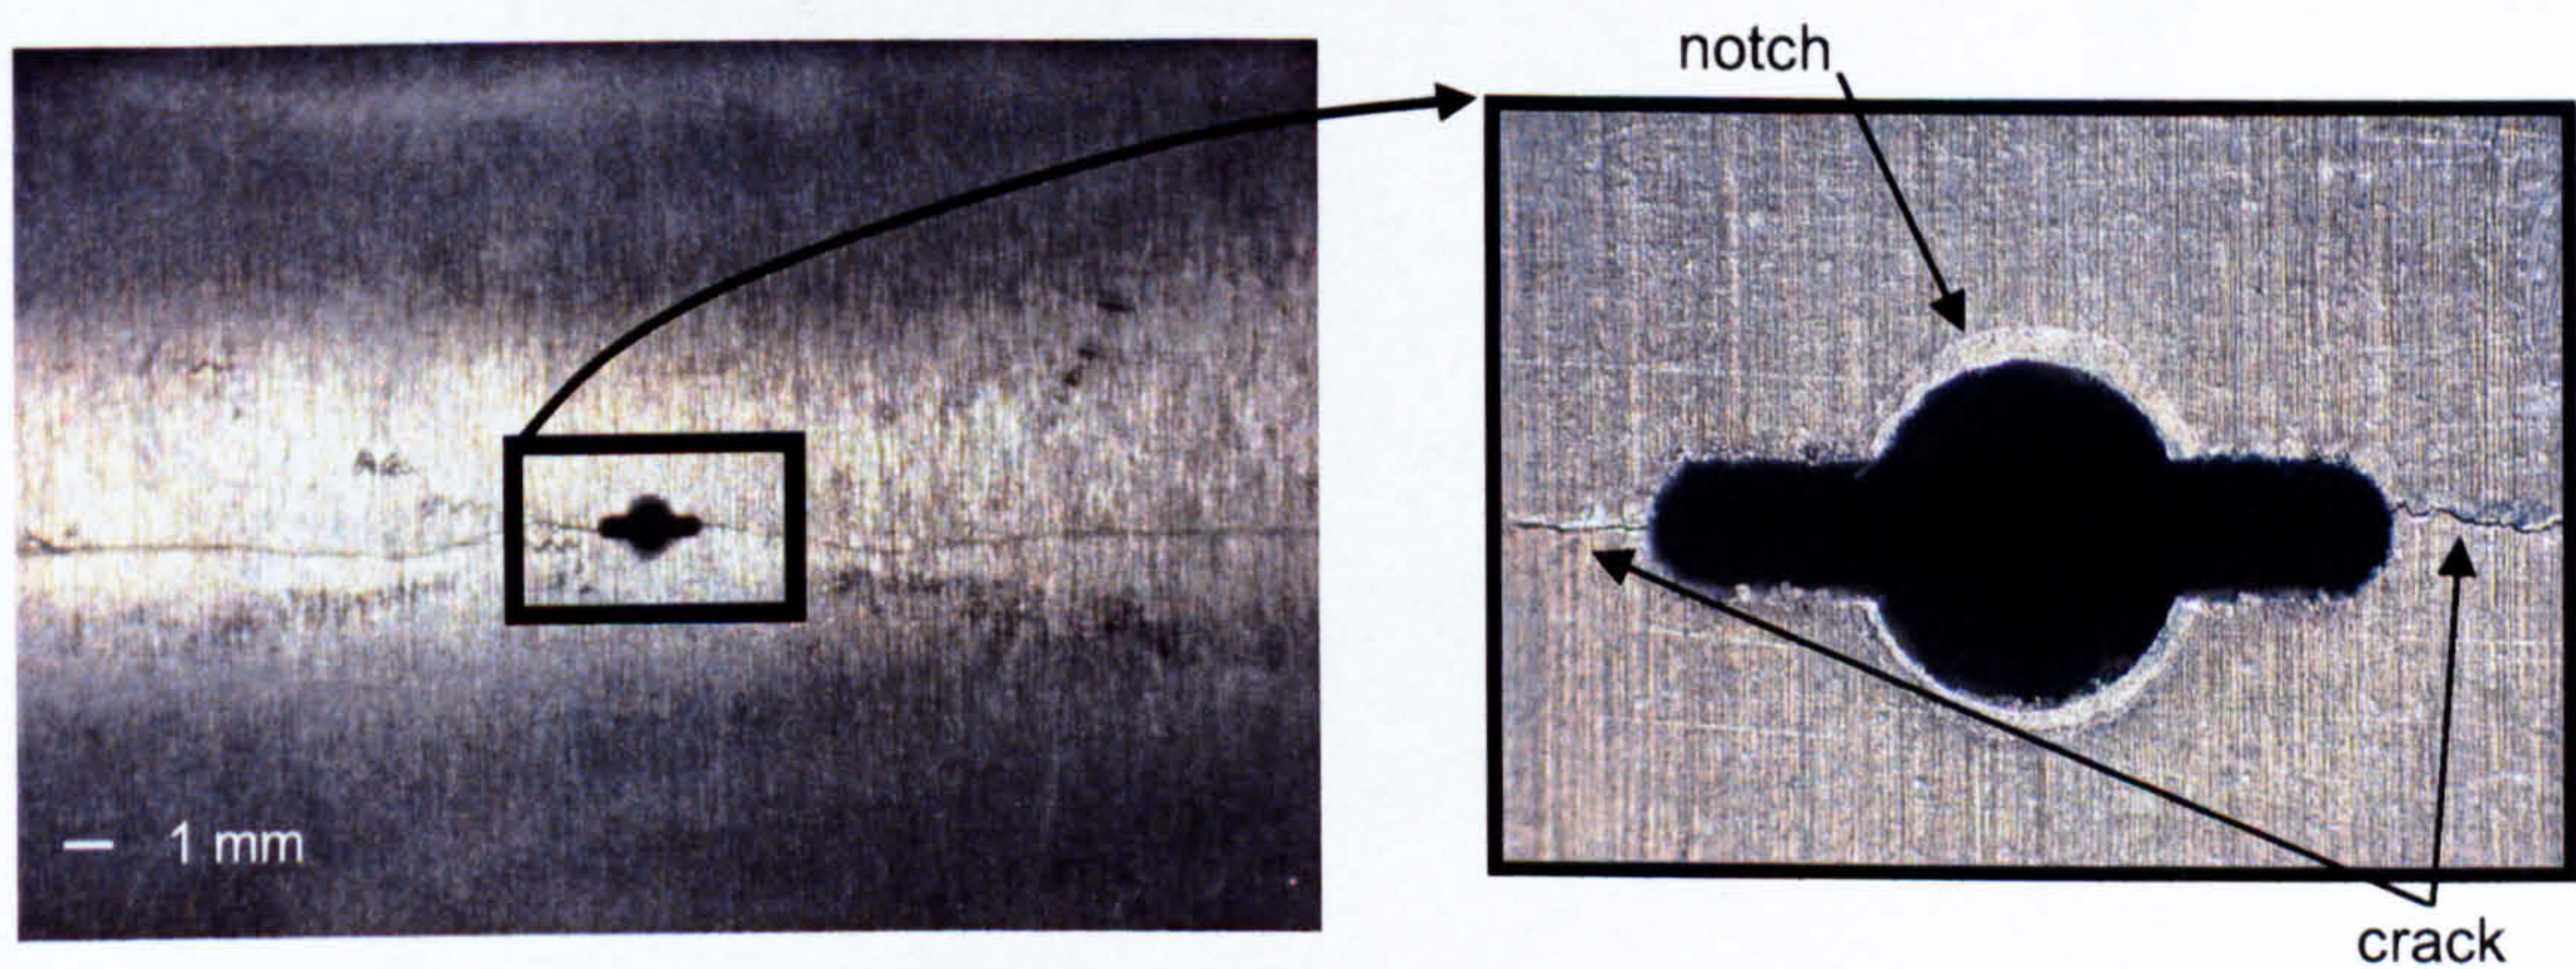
Photograph of specimen 1 and detailed view of the crack.
